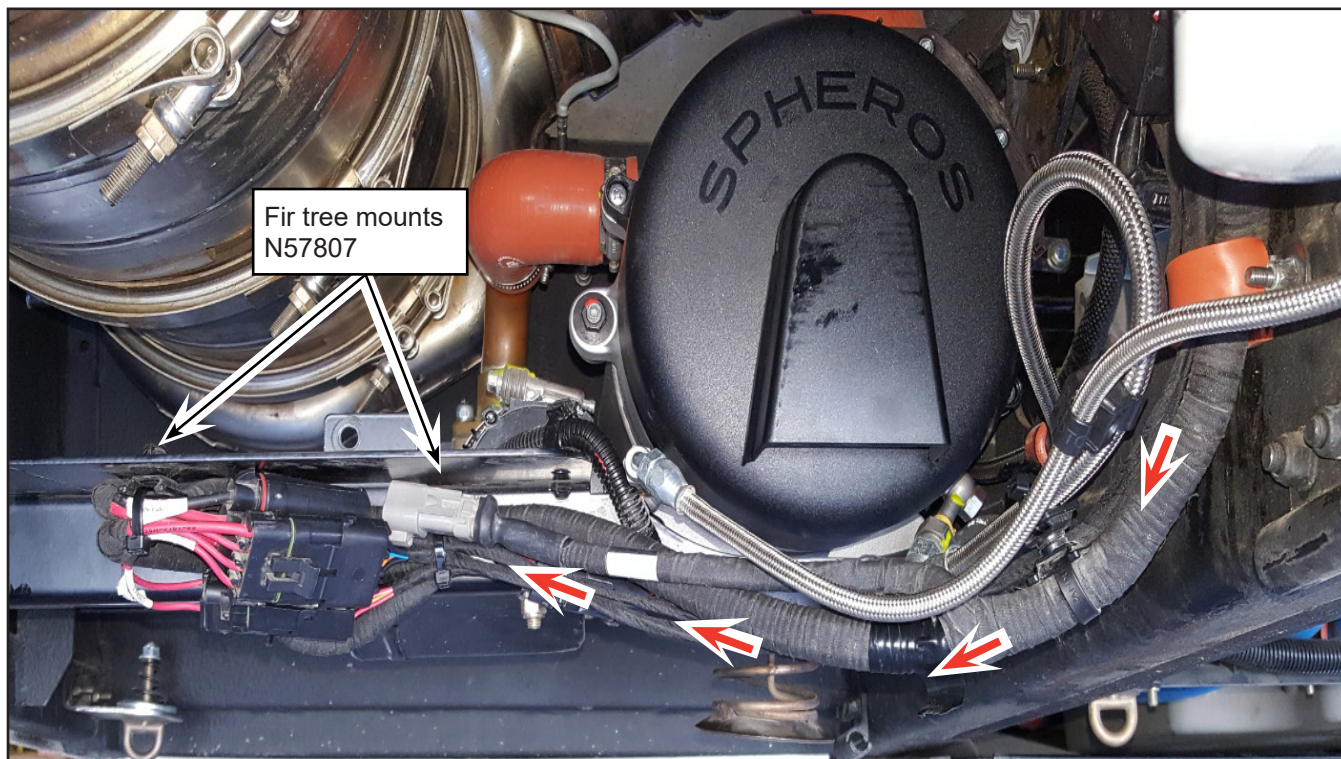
Route and Secure the Harness (View With the Cradle Bolted in Place)
